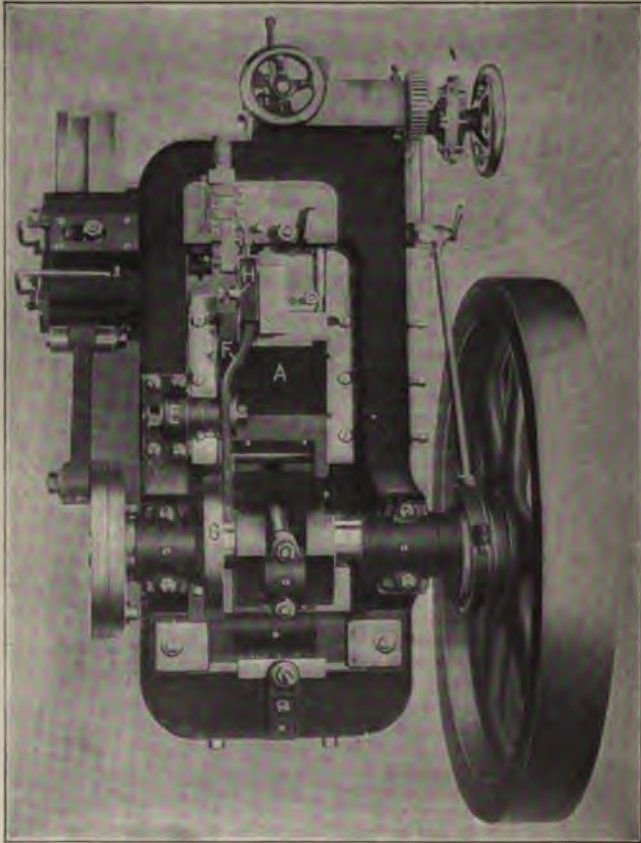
Plan View of Blake & Johnson Double-stroke Solid-die Header
